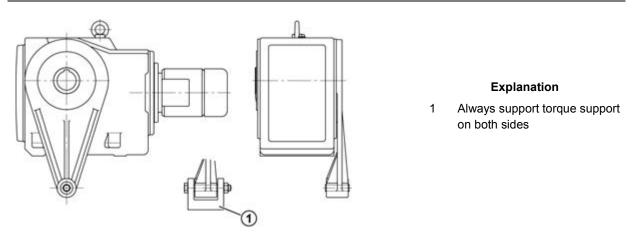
Attaching the torque support on bevel gear and worm gear units
